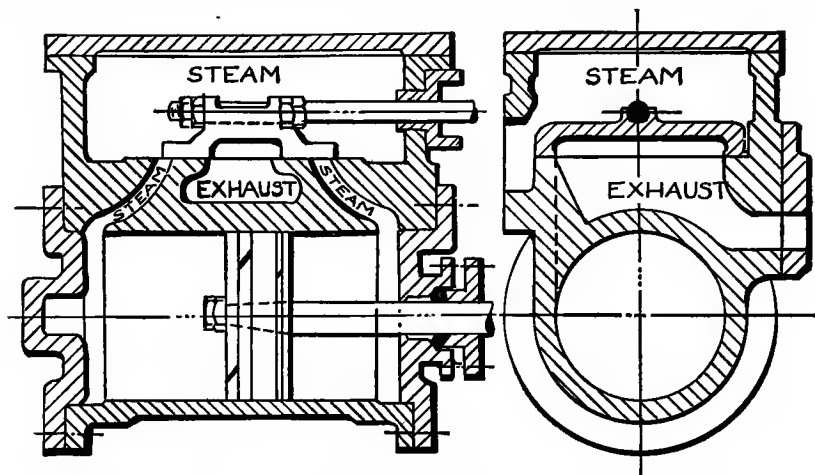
Sectional view of plain slide-valve engine, showing the cylinder and valve chest.
